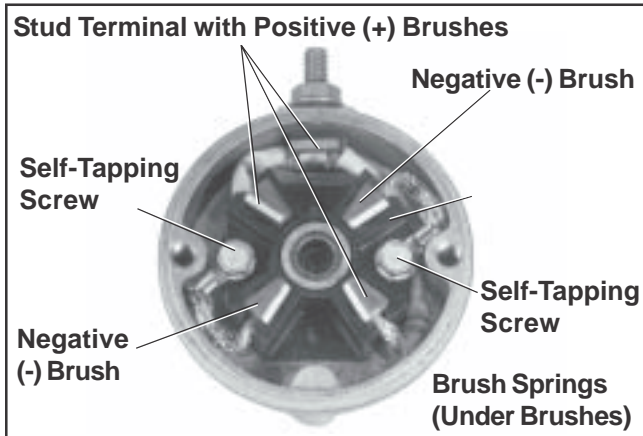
Style "A" Commutator End Cap with Brushes.
